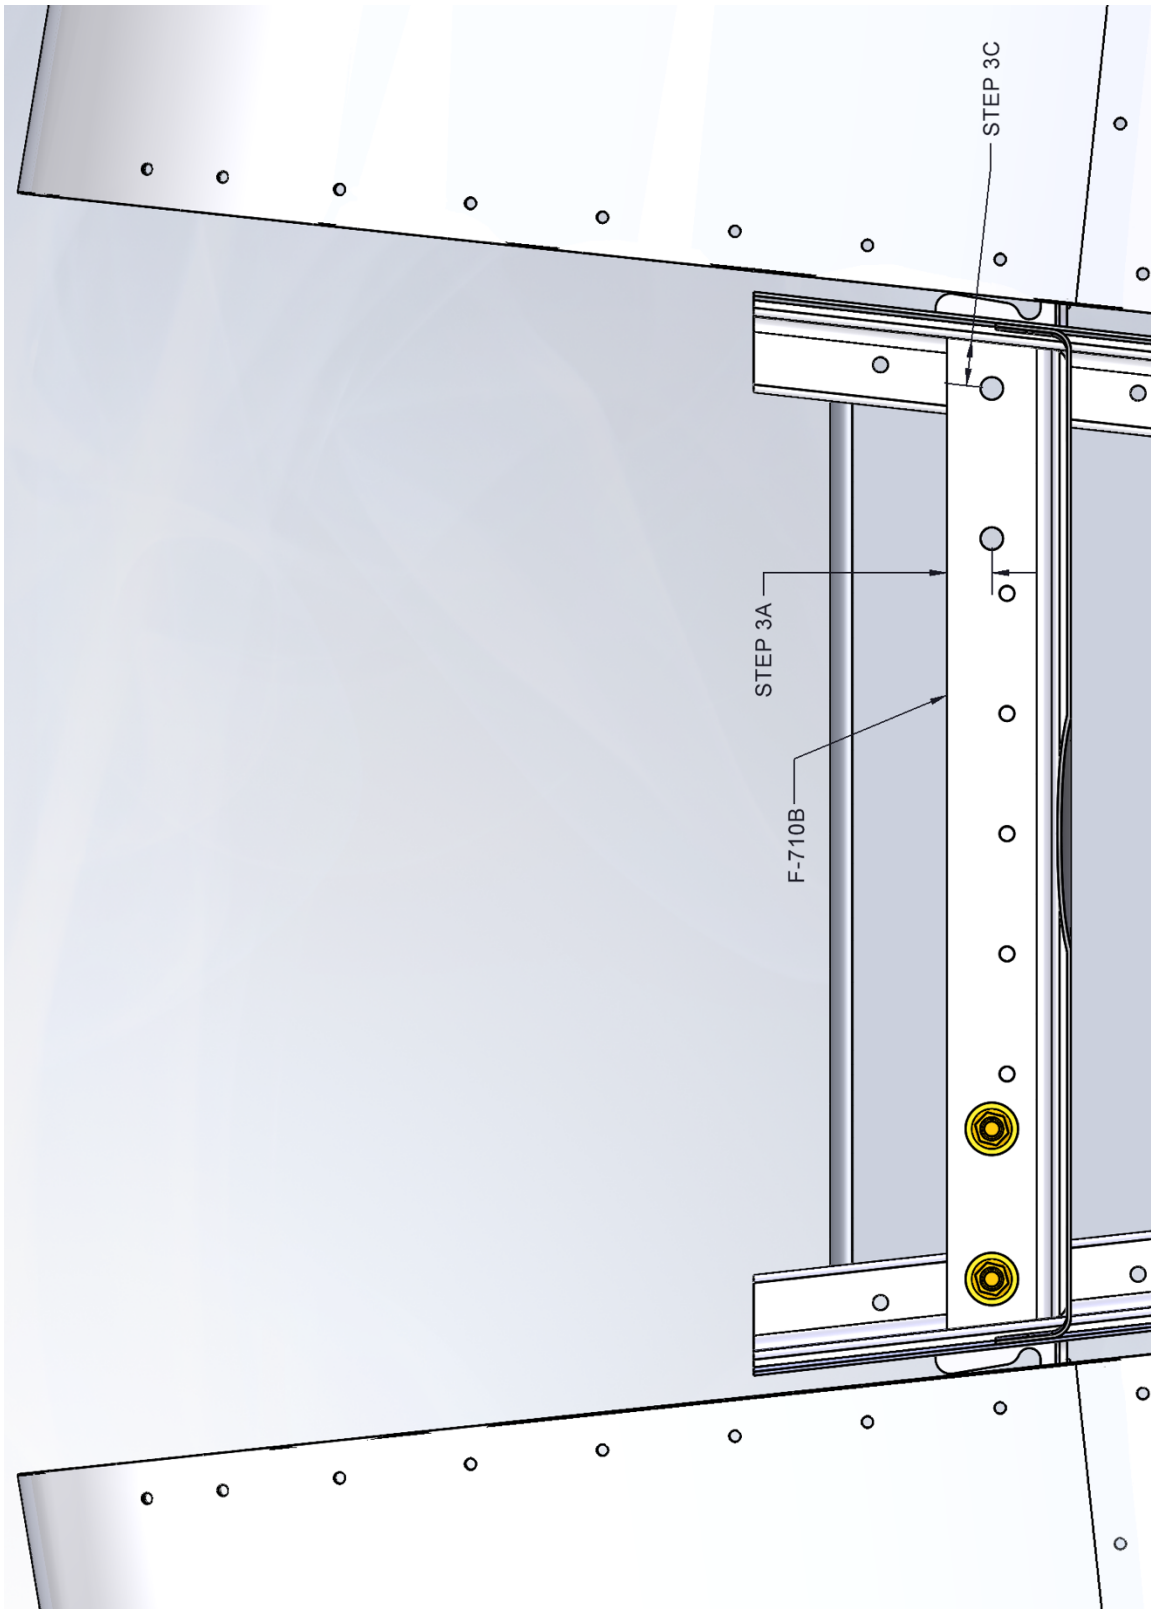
BOTTOM VIEW STEP LOCATIONS
